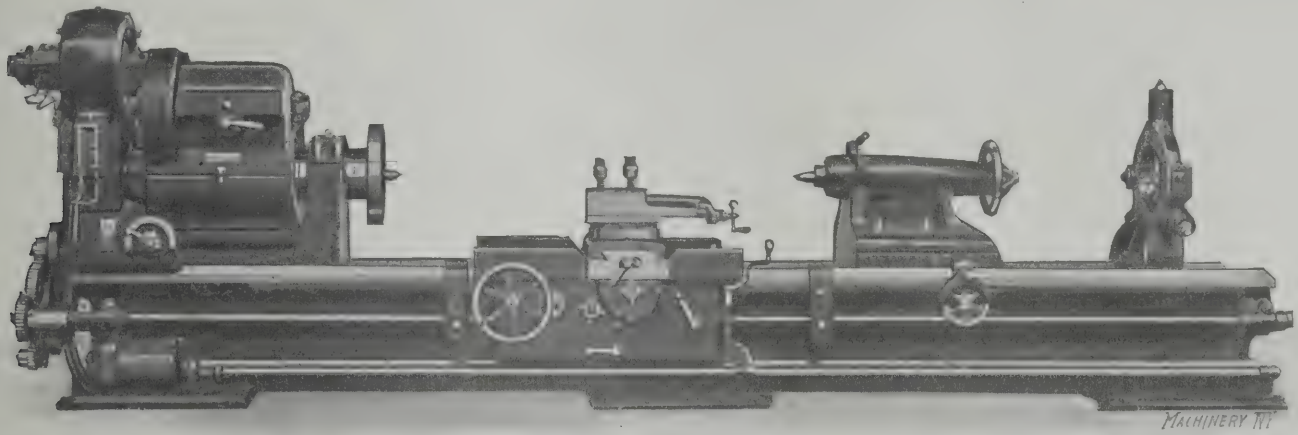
Heavy Motor-driven Lathe built by the Springfield Machine Tool Co.
